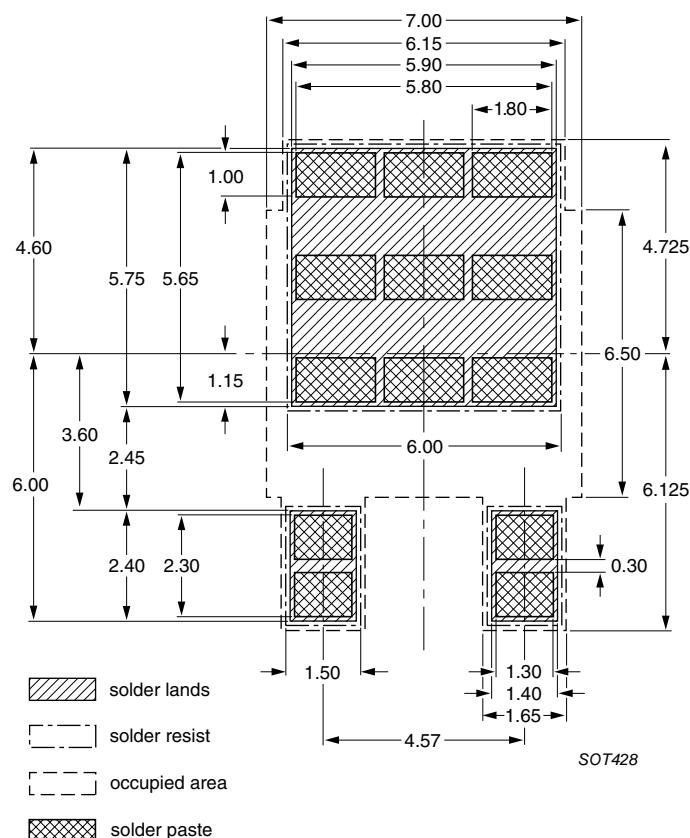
Reflow soldering footprint for SOT428 (DPAK)
